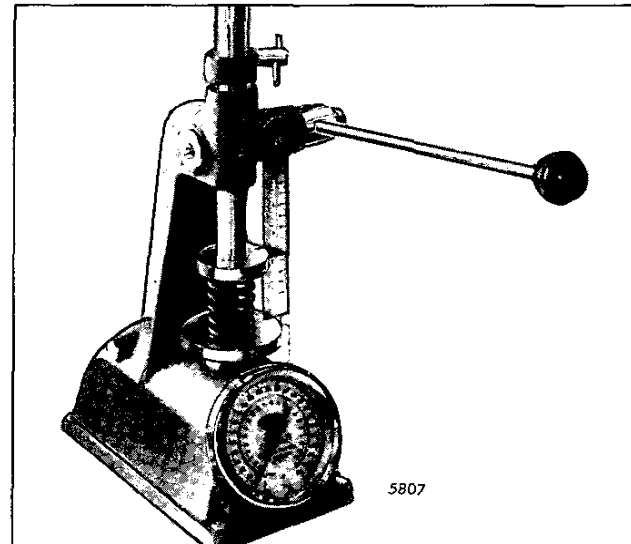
Testing Cam Follower Spring Using Tool J 22738-02
